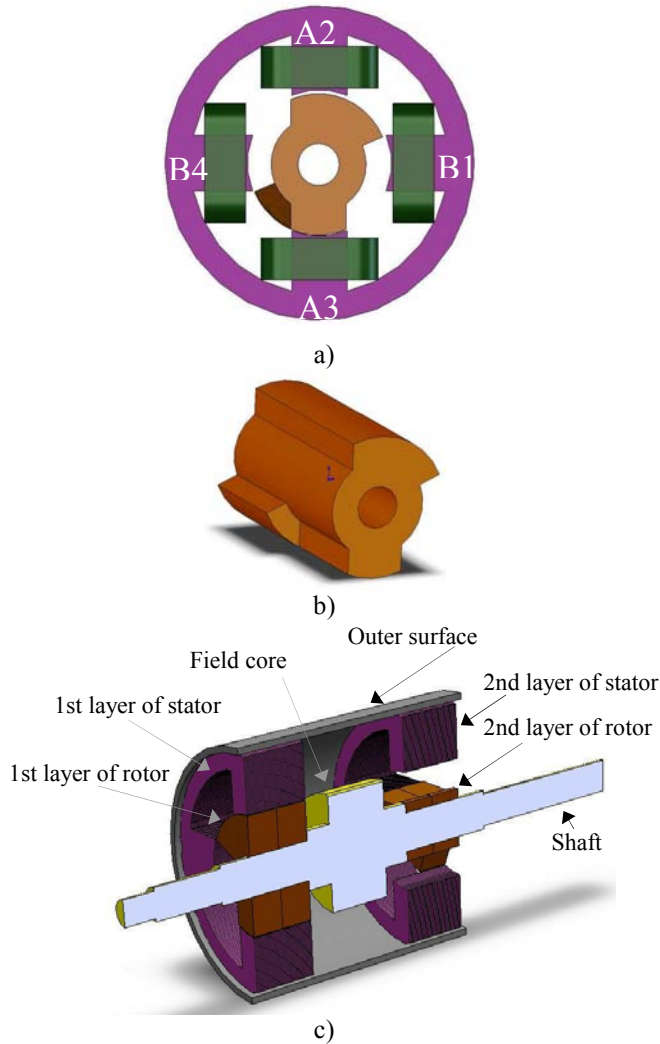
a) Front view of 1st layer in DLSRG, b) rotor shape, c) a side view of DLSRG assembly (without coils).
